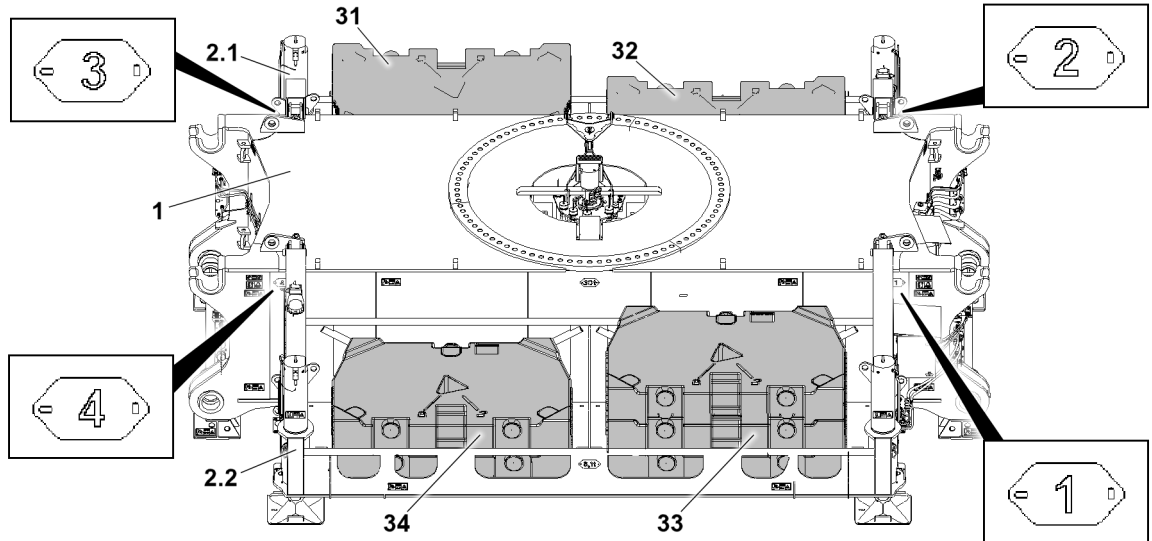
Example: Crawler center section 1 with 110 t central ballast out of ballast plates with 10 t individual weight.
